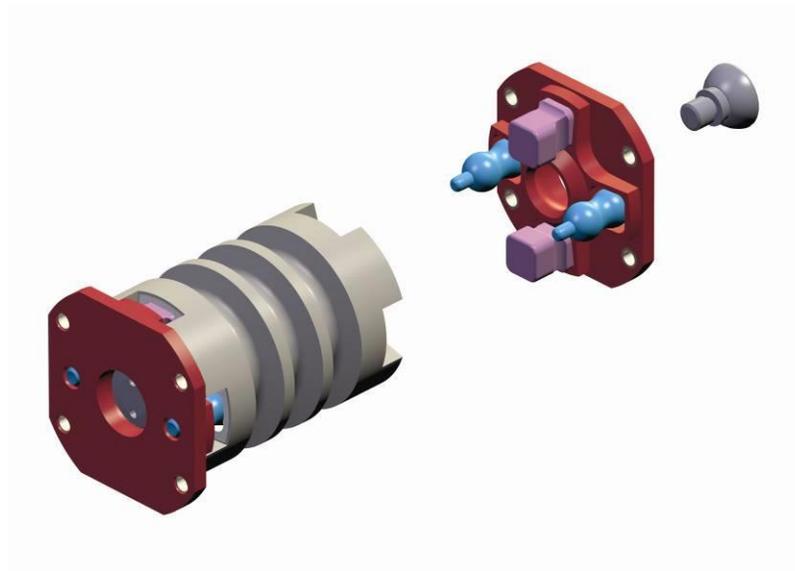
Neck Dampers are free to be removed when retaining plates are removed
